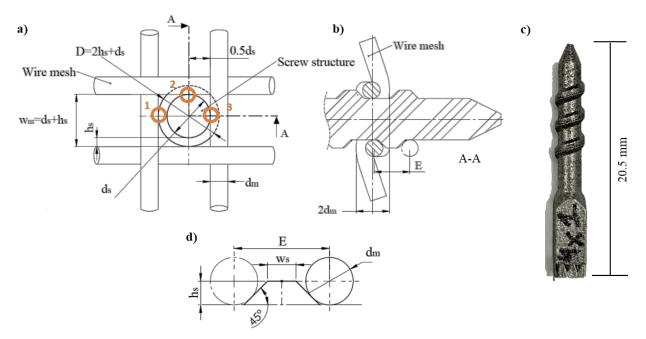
Geometric illustration of the screw gripper element in top view (a), and side view (b); gripping element produced with SLM (c), close-up to screw rod (d)
